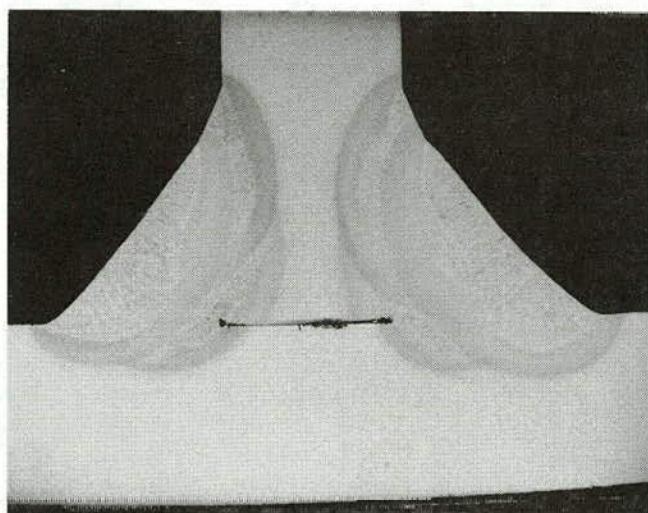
Macrosection of fillet weld soundness test for weld W88, air plasma-cut edge on Grade 36 plate, 12.7 mm (½ in.) thick, welded by SAW. Original mag. $\times 2.5$; as shown $\times 1.75$.
